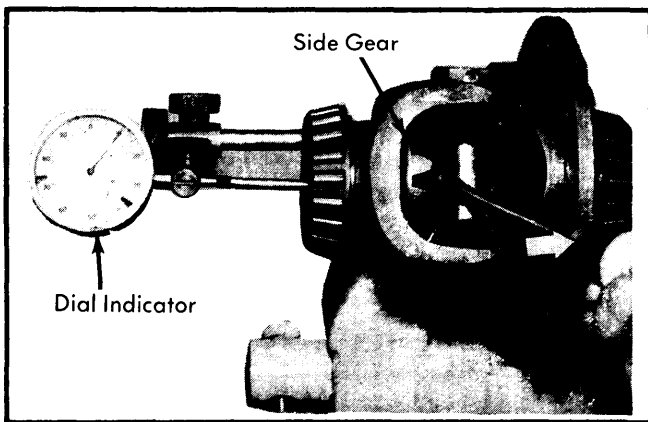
Checking Side Gear-to-Pinion Gear Backlash
